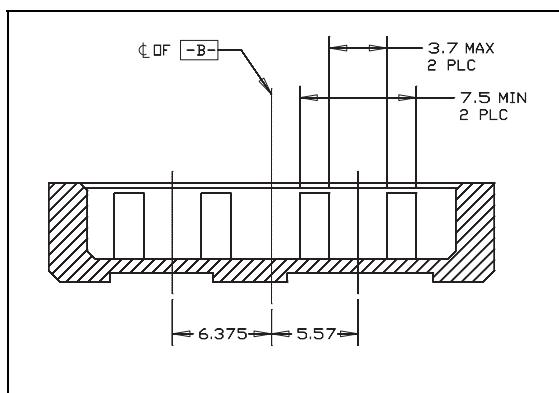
Slimline device plug connector interface dimensions (section G-G)
